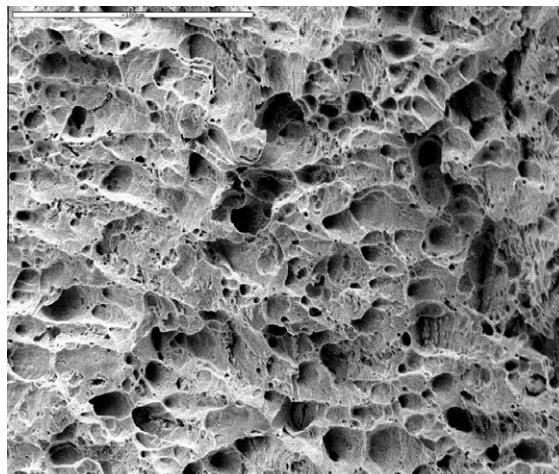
Fracture surface M65-04, ductile fracture with etching pits at the seams of the fracture surface. SEM, SE mode.
